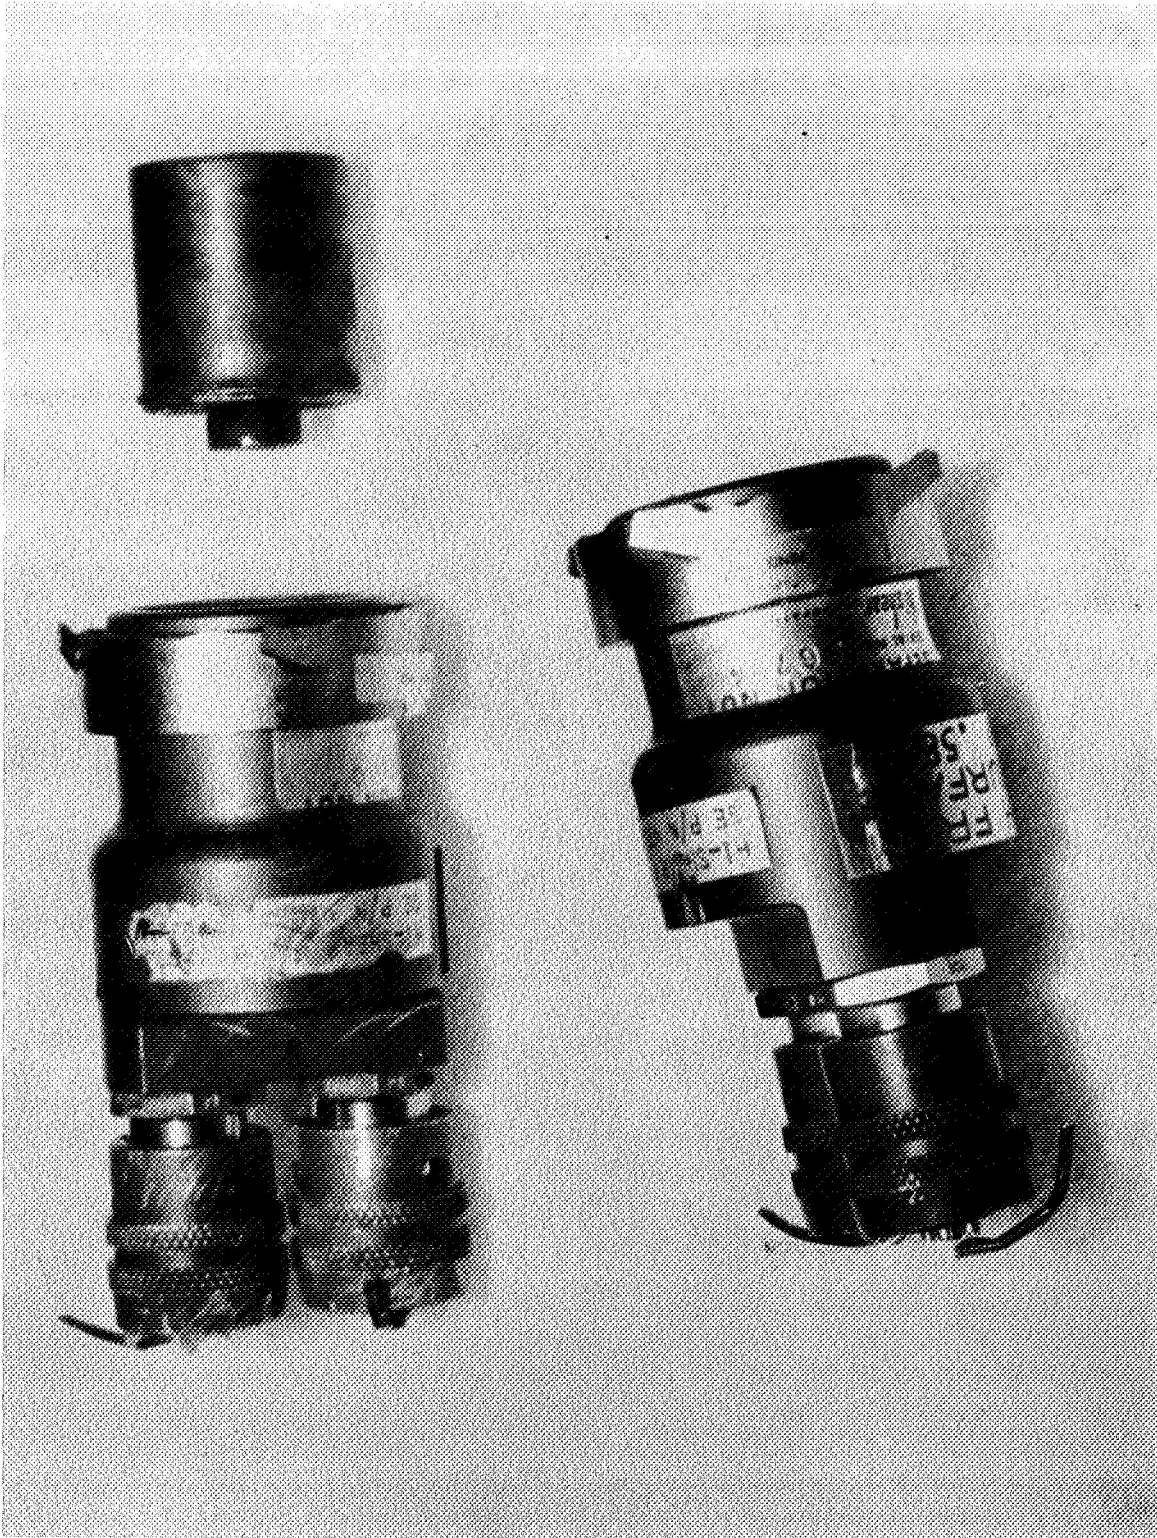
Both Separation Nuts with Fractured Mounting Bases (VF 70244C)
